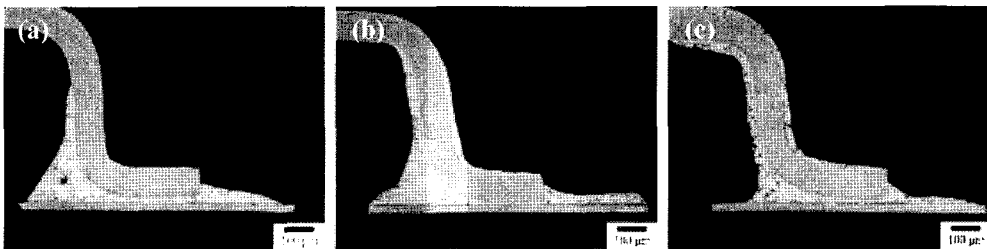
The cross section of Sn-8Zn-3Bi solder joint. (a) Sn plating on Cu LF (b) SnBi plating on Cu LF (c) SnPb plating on Cu LF.
